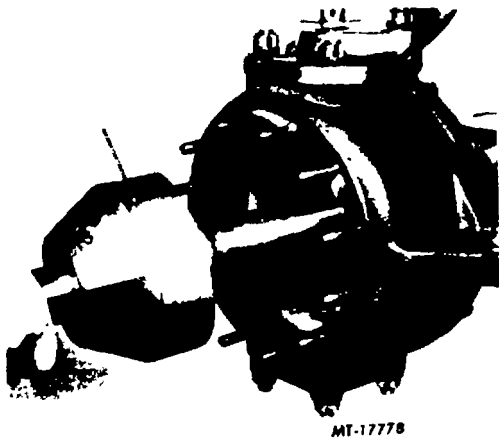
Removing Axle Shaft and Universal Joint Assembly
